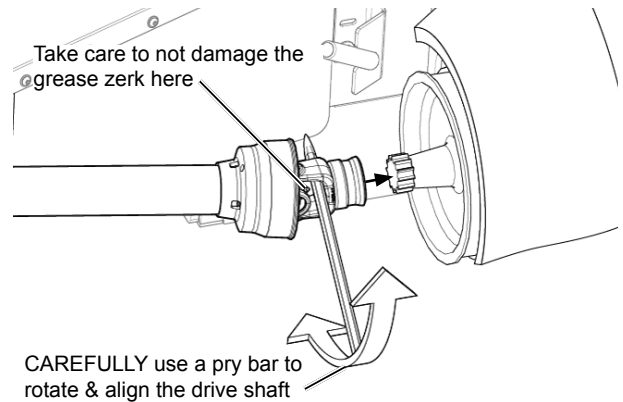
Connect Drive Shafts (both sides of feeder house)
